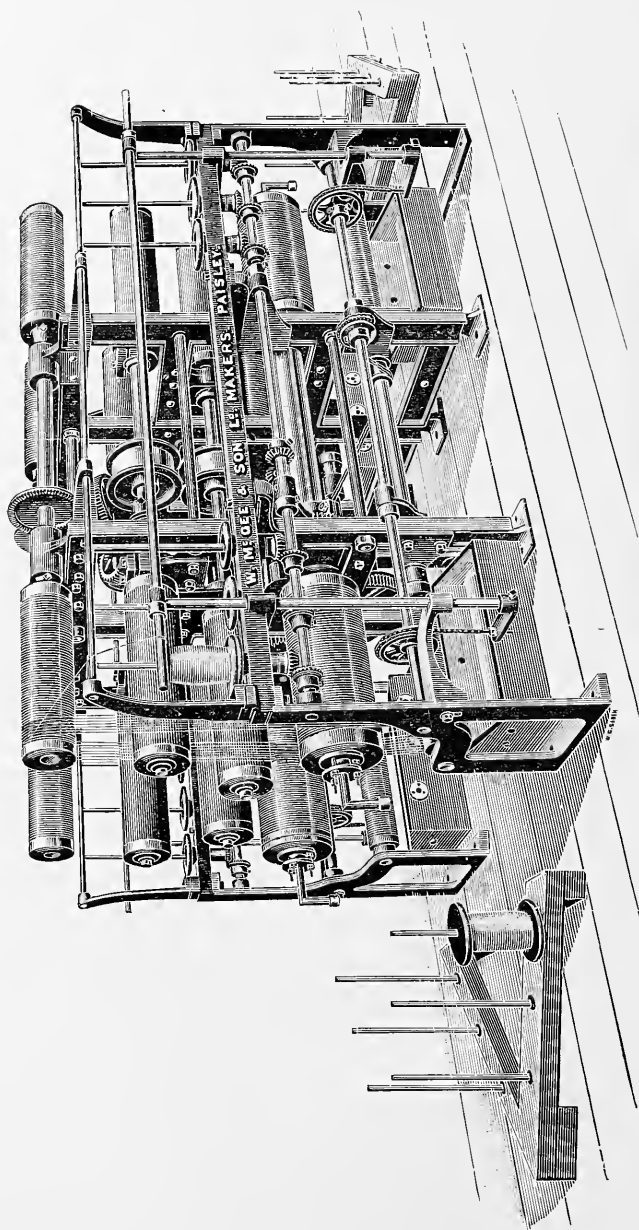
Bobbin-to-bobbin cord polishing machine. (Made by Messrs Walter M'Gee & Sons, Ltd., Paisley.)
